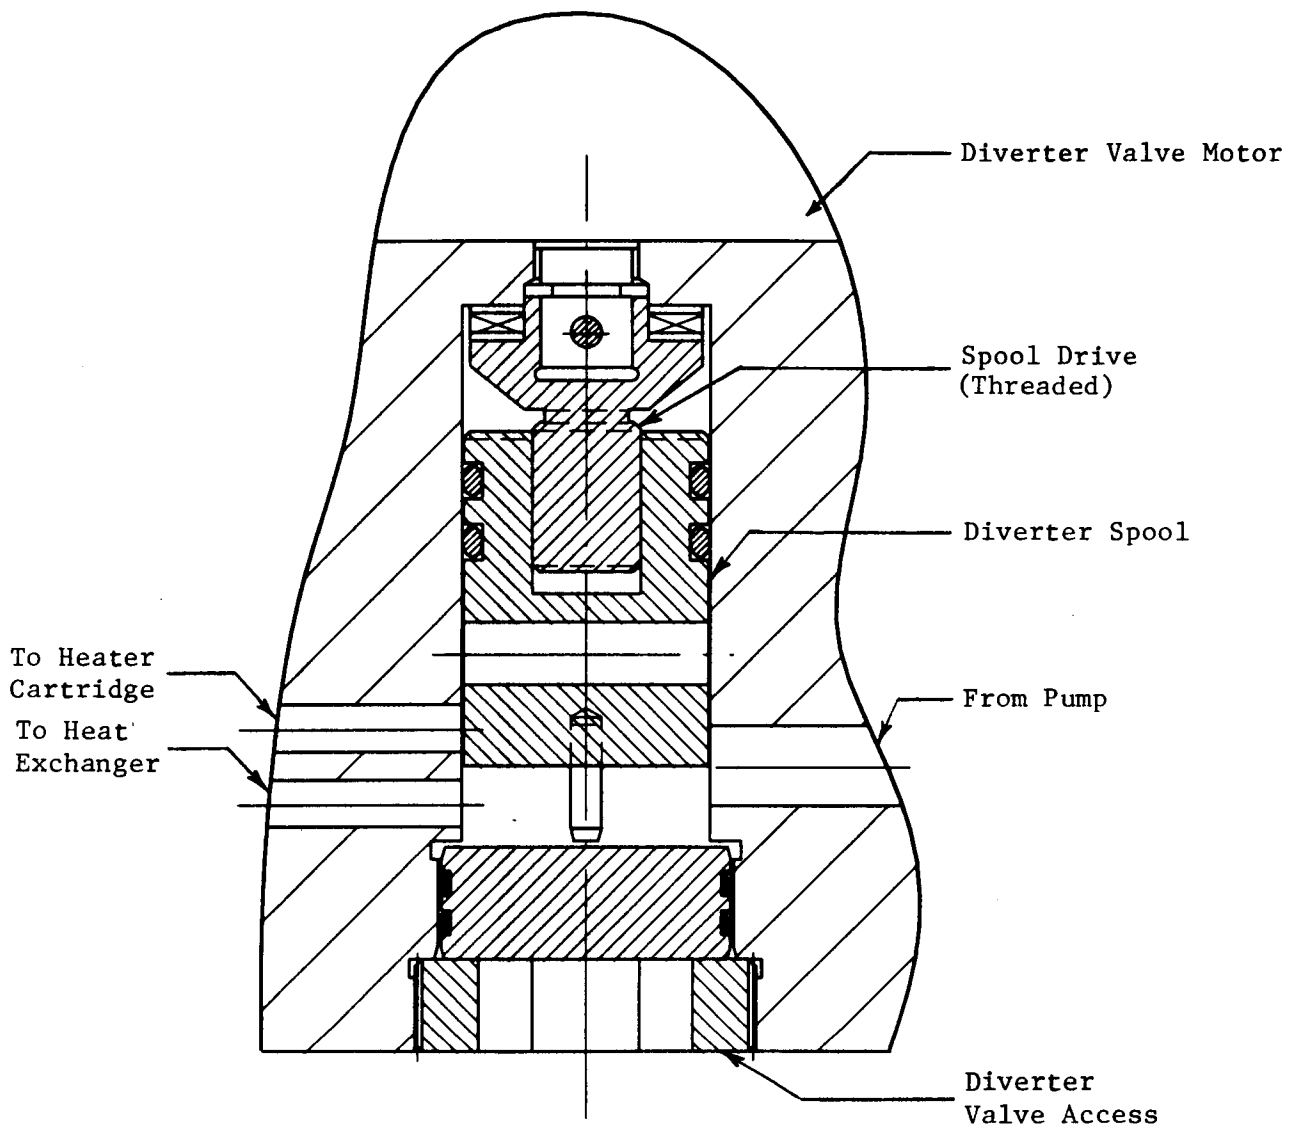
TCA CROSS SECTIONAL SCHEMATIC OF DIVERTER VALVE ASSEMBLY
